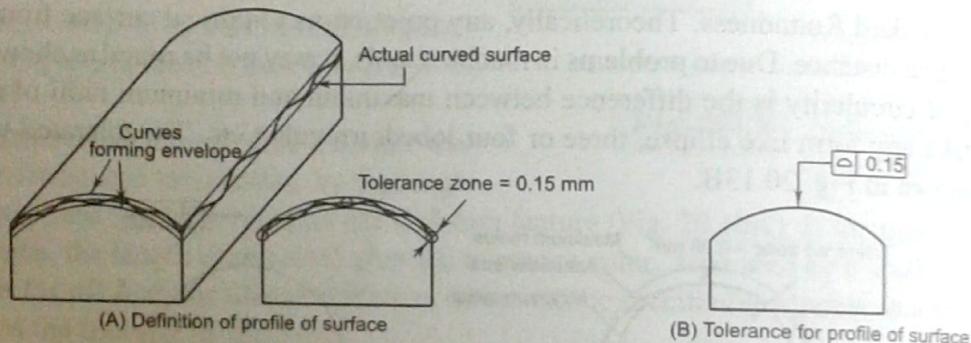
Indicating Profile of a Surface on a Drawing
